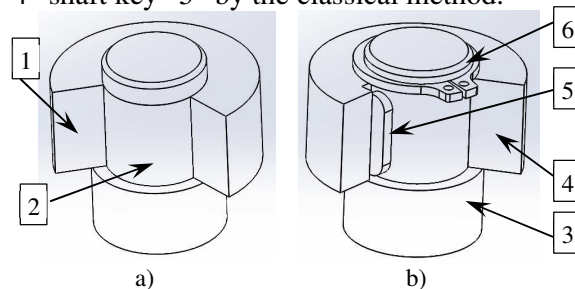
a) Bonded assembly shaft – hub, b) Classical assembly shaft – key – hub
